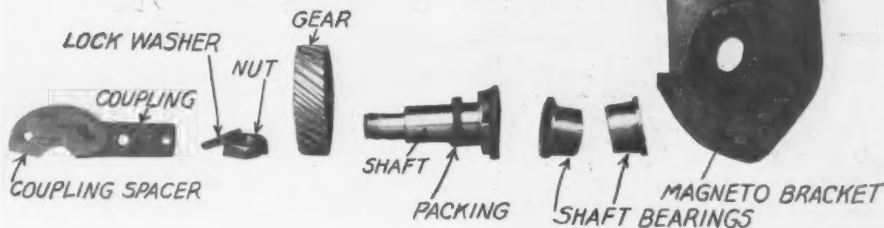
The Magneto Drive Assembly and With Components Arranged in Order for Reassembly
